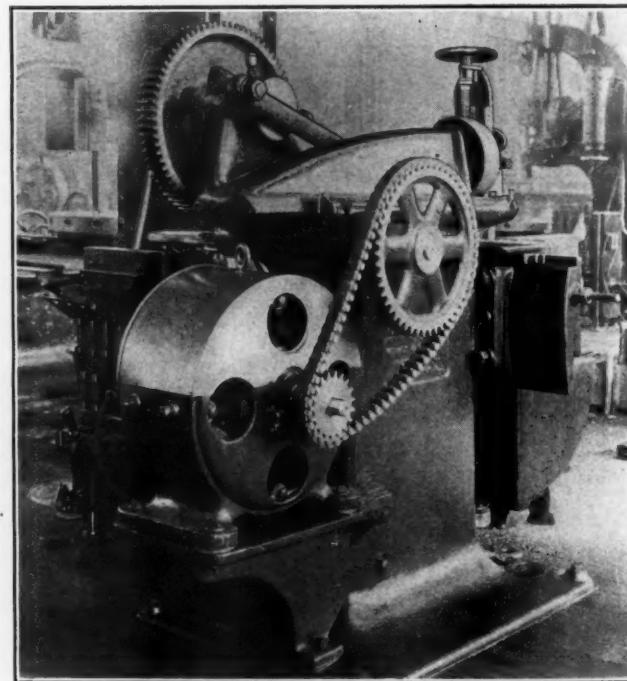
A COMPACT ARRANGEMENT OF VARIABLE-SPEED MOTOR DRIVING UPON A 12-IN. HEWES & PHILLIPS CRANK SHAPER.—5 H.P. CROCKER-WHEELER MOTOR.
